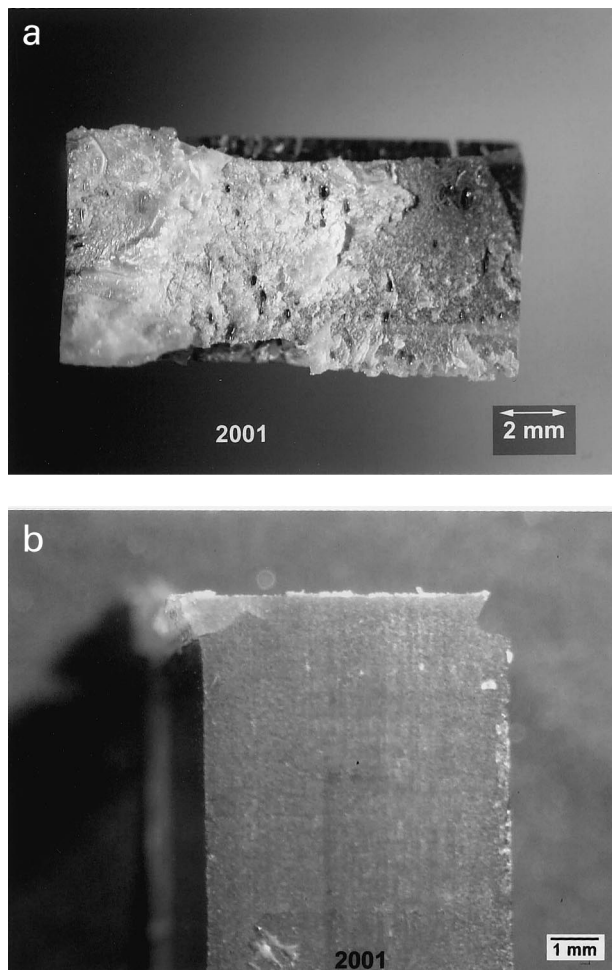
Fracture surfaces of 6.2-mm-thick PEI specimens for hot-tool weld made at  $T_H = 410^\circ\text{C}$ , a heating time of 20 s, melt and weld penetrations of 0.13 and 0.91 mm, respectively, and a seal time of 10 s. (a) Top view, and (b) side view.
